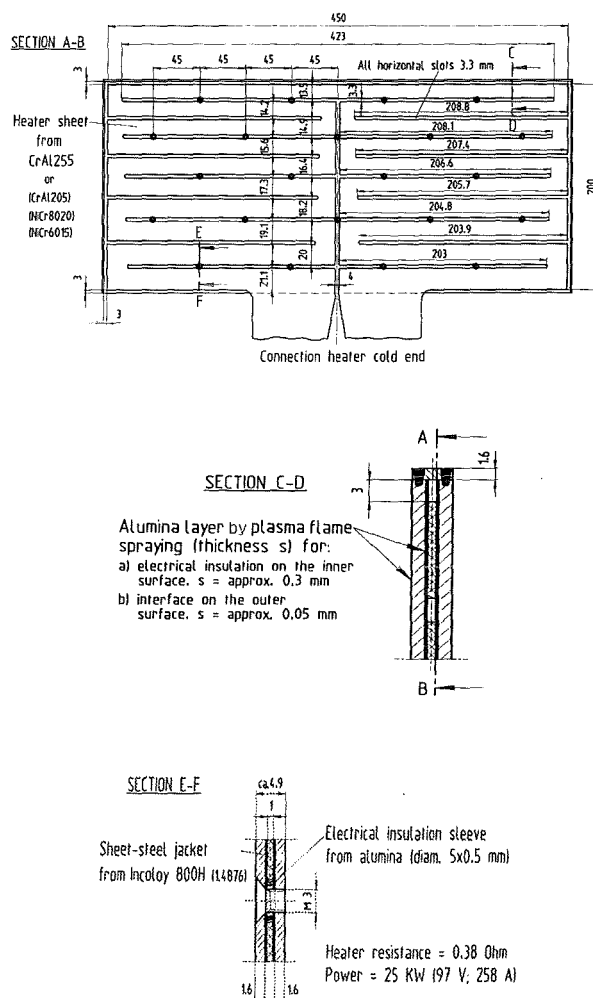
Heating plate construction for HE-FUS3 test section (e.g. for beryllium pebble bed)
